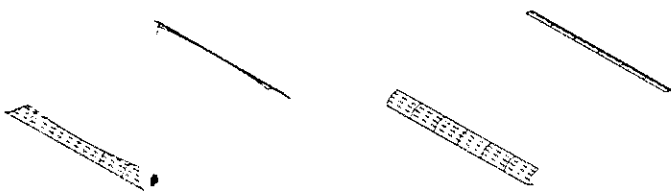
Trimmed surfaces, base surfaces, and wire for the skirt surfaces
